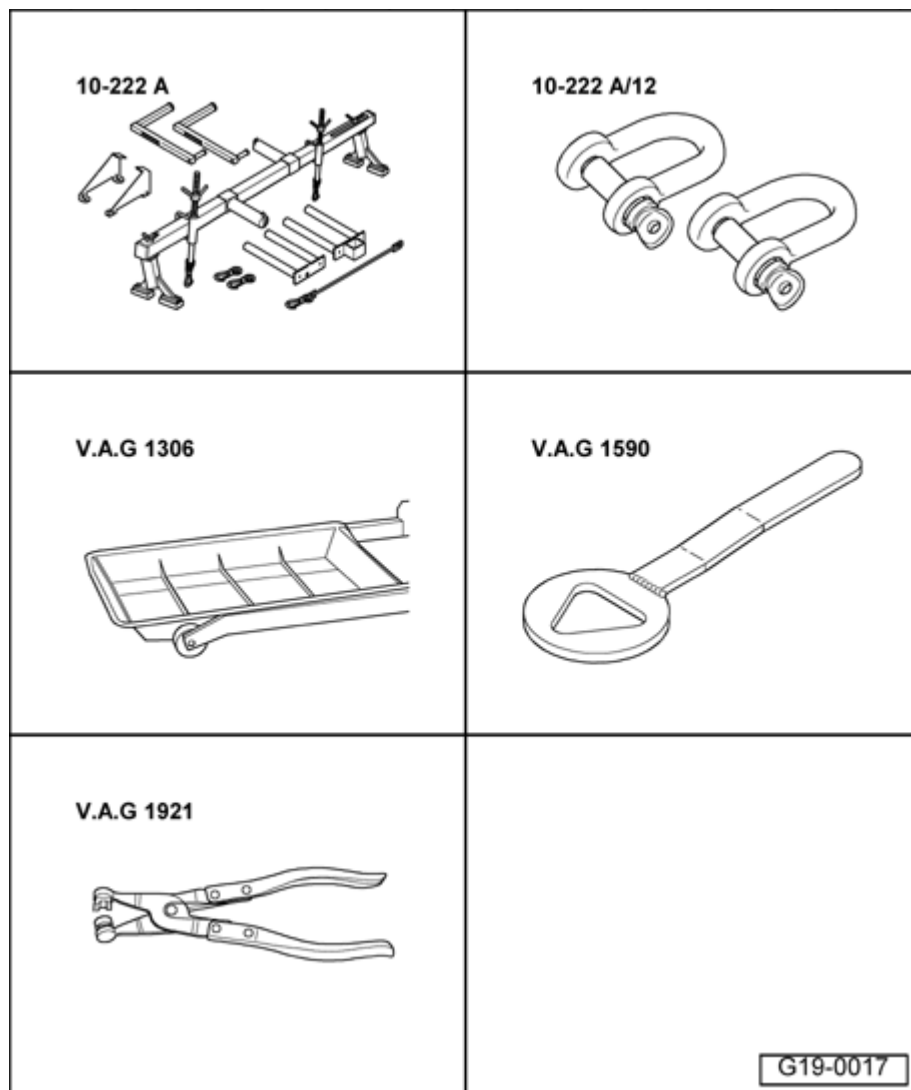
Identifying Special Tools - Coolant Pump, Removing And Installing
